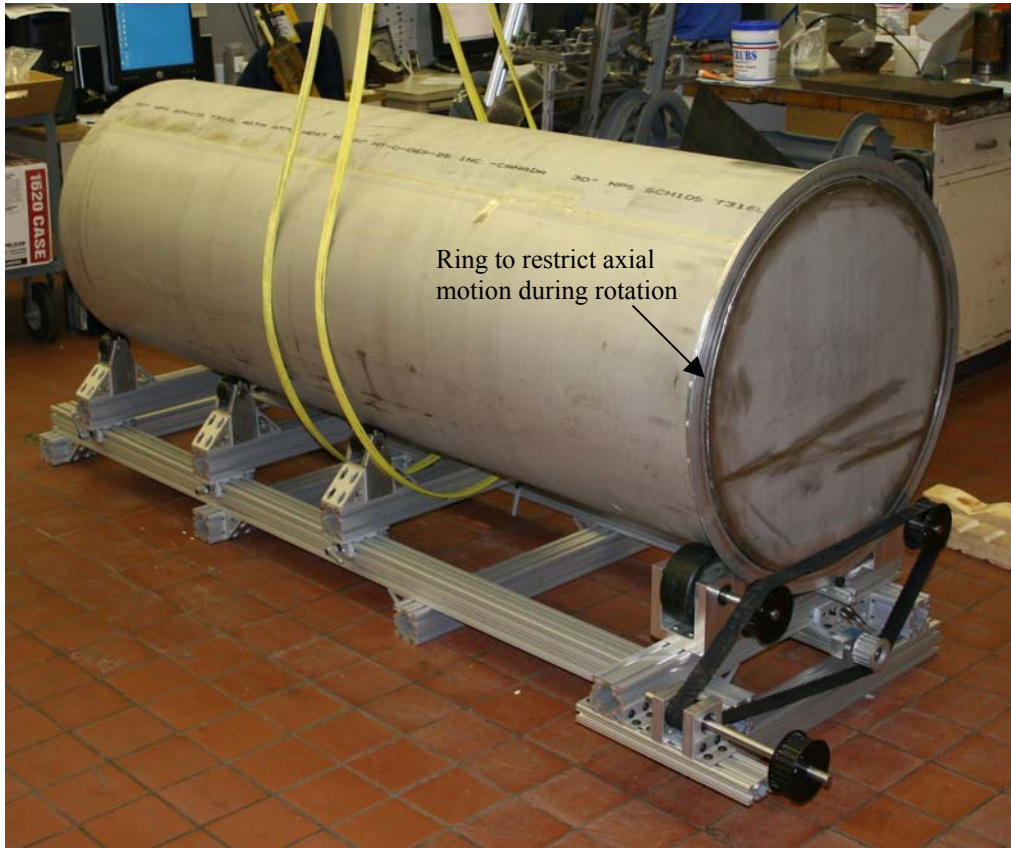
Prototype container mounted on the rolling fixture used for spraying. Note ring that was mounted on the end to restrict the axial motion of the container during rotation.
